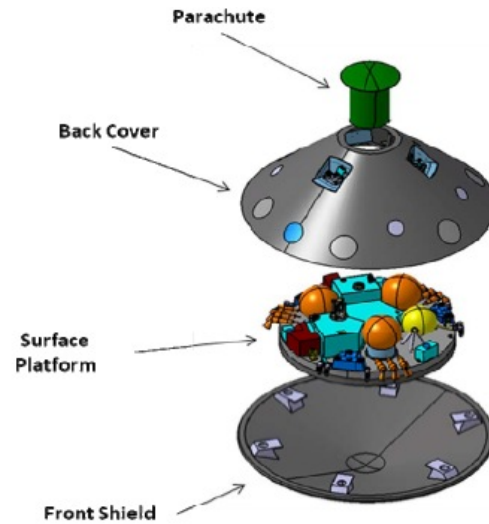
EDM exploded view (ESA, TAS-I).
